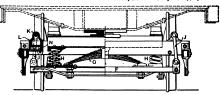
Half Cross-Section and Half End Elevation—14A Truck
